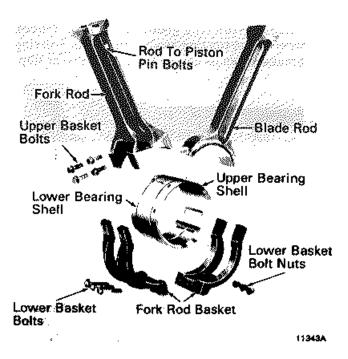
Connecting Rods, Bearing Shells, And Basket
